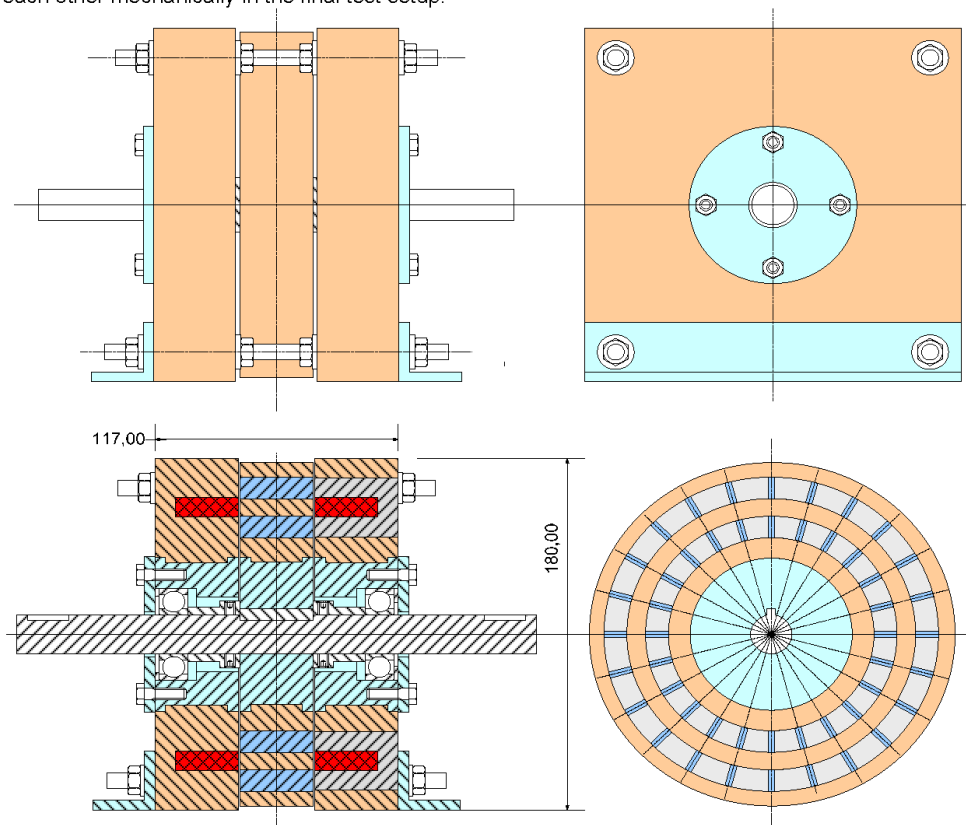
Top: side view and view in axial direction of the designed machines. Bottom, left: cross sectional view of the assembled machines. Bottom, right: side view of the disc shaped rotor.
